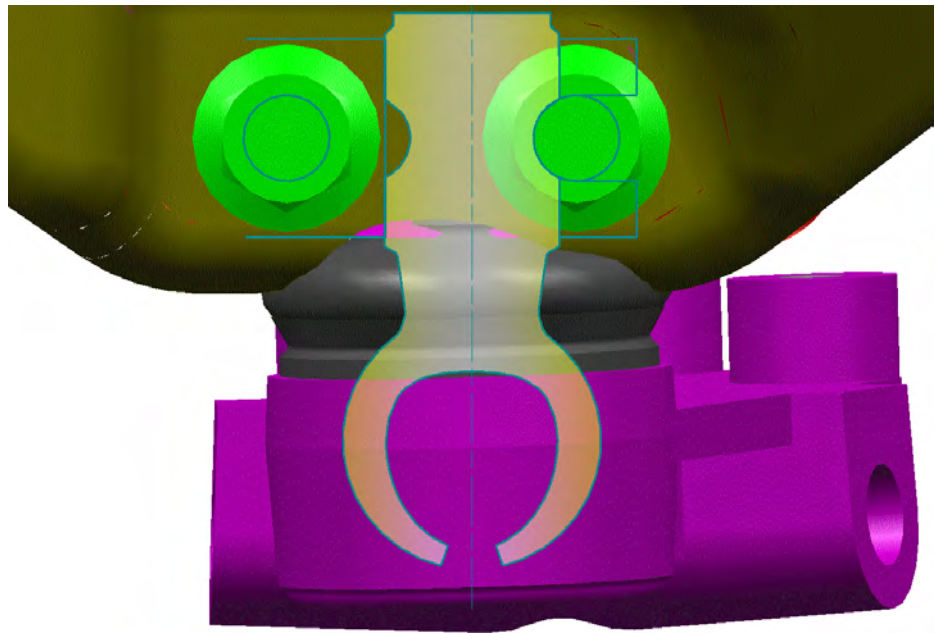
Location of outer ball joint in knuckle to lower wishbone assembly
